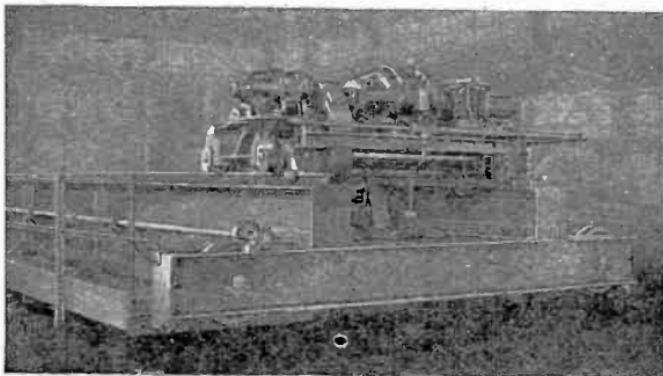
,879.—*Euclid crane construction 6.* End truck construction and driving side of the crane trolley. In design the line shaft bearings are closely spaced.
